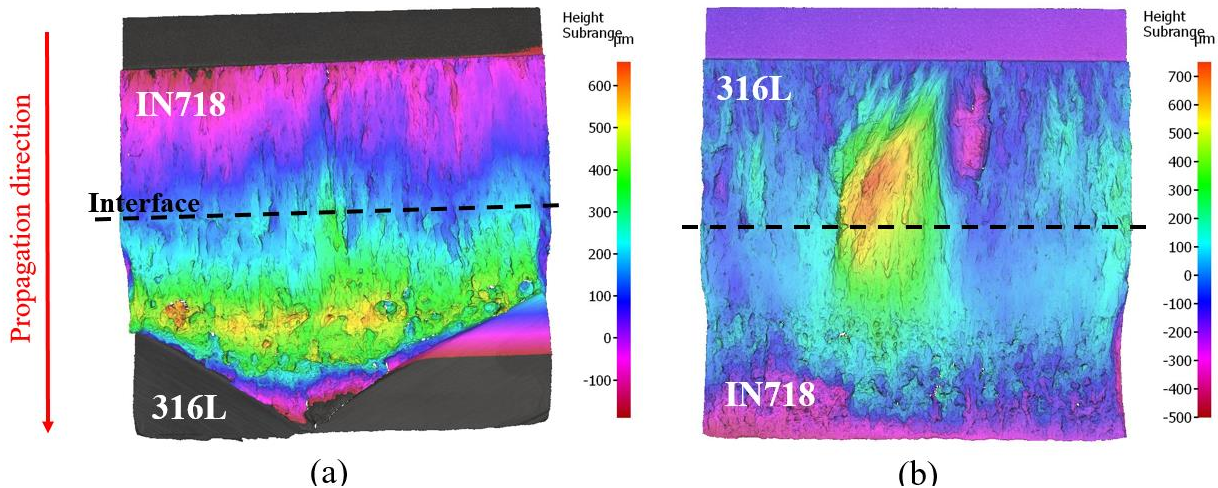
Roughness map of fracture surfaces, long crack test with increasing ΔK in HTed bi layer specimen, a) specimen N°1, b) specimen N°2.
